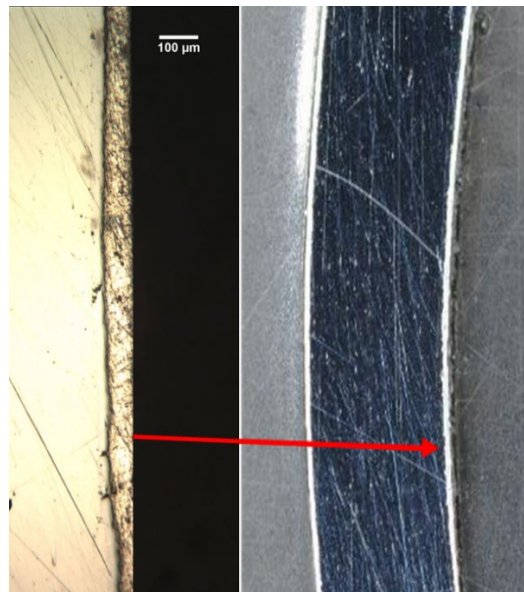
Coating defects within the bends of a lock-seam.
